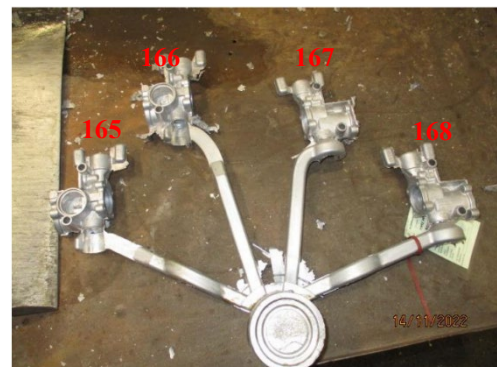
Aluminum casting produced in a four-cavity mold, with numbered cavity identification
